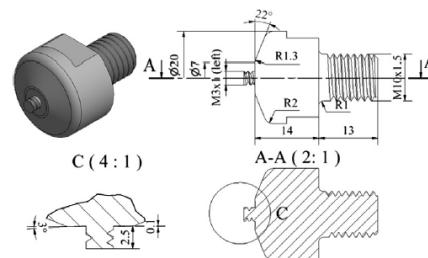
Geometry of the tool used for post-processing MIG\_R + FSP specimens (dimensions in mm).
